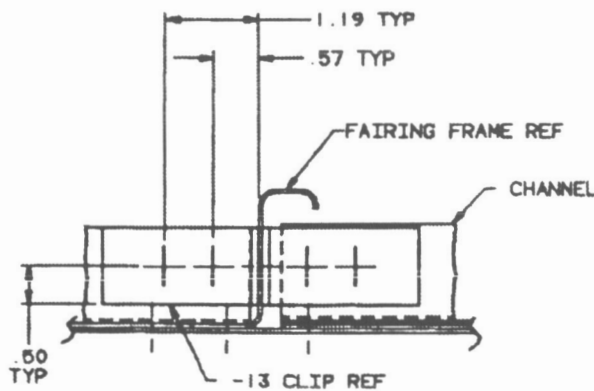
Sectional view of the wheel well Fairing. Button head fasteners are Not shown.
